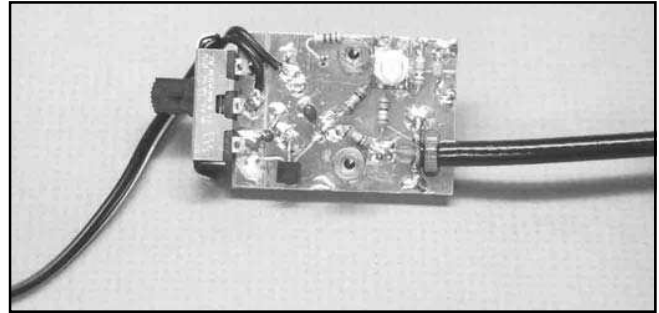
Component-side wiring uses “ugly construction” approach—very easy and effective for assemblies like this. Notice the output cable braid dressed and soldered to the chassis board.
